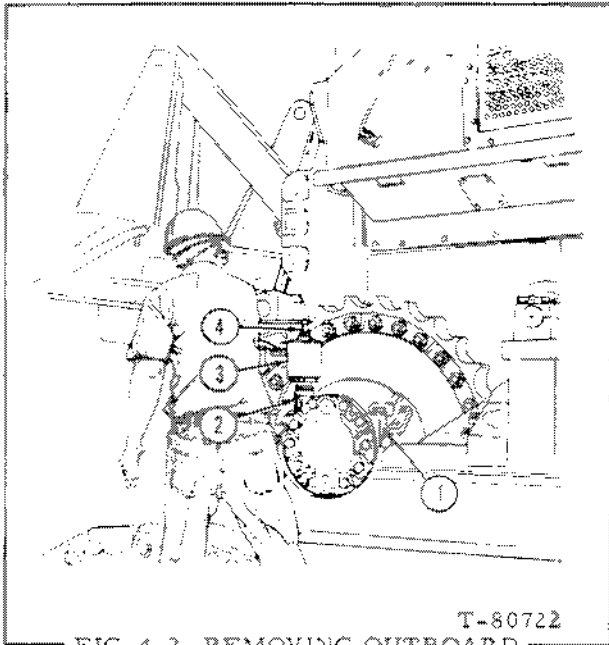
REMOVING OUTBOARD BEARING CAGE CAP CAPSCREWS
